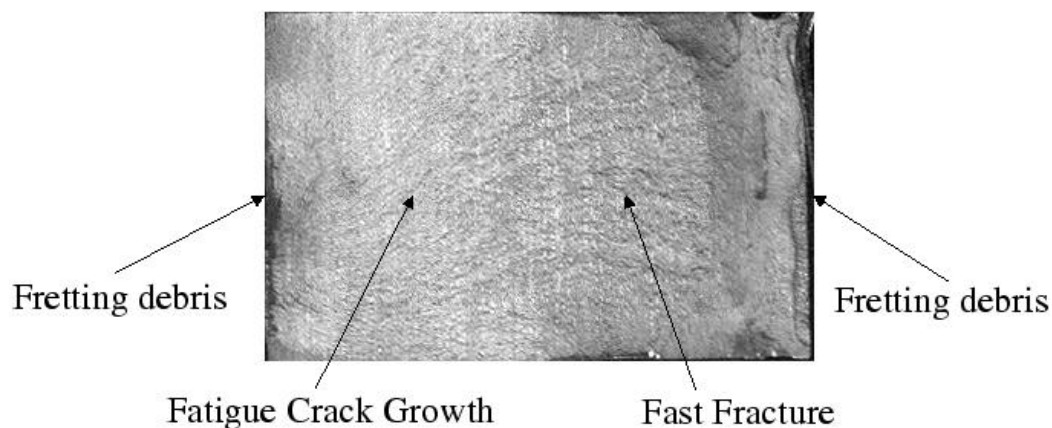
B.8. Fracture surface. (Experiment no. PR12).
